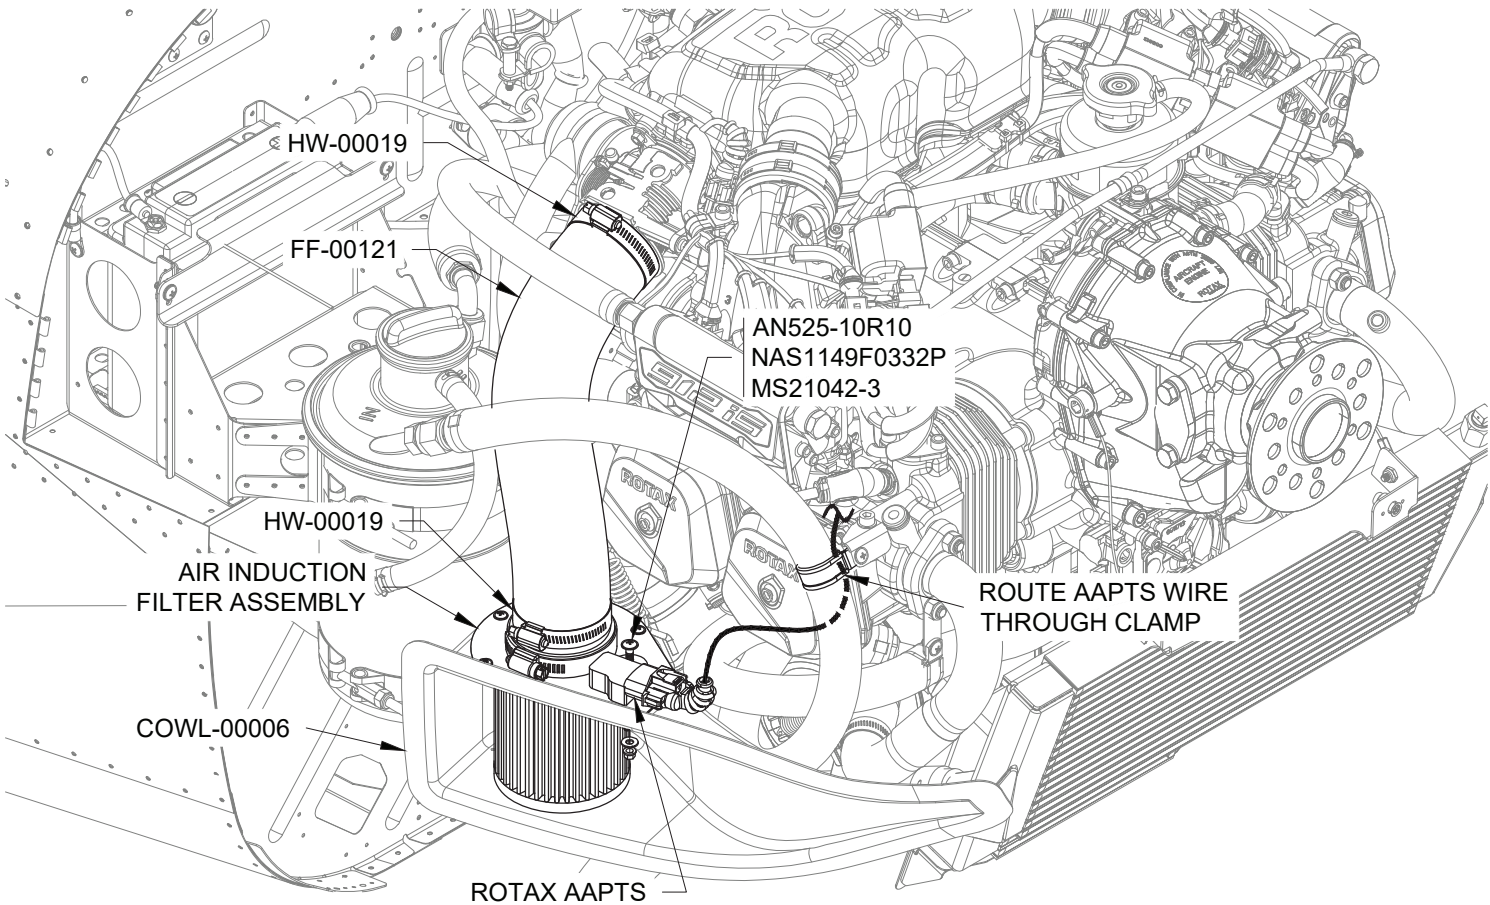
AIR INDUCTION FILTER ASSEMBLY ATTACHMENT
